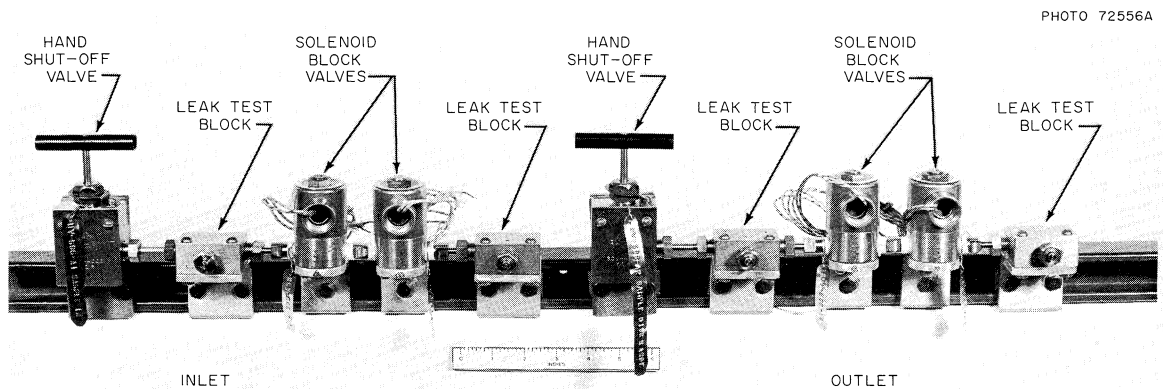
Reactor Cell Oxygen Analyzer - Block Valve Header Assembly.
